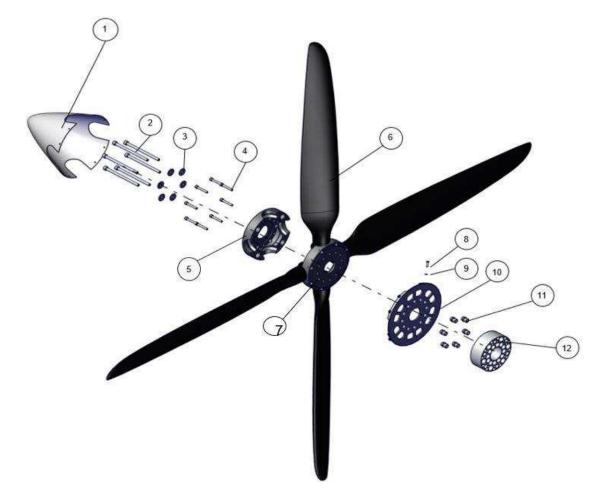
HTC 4 Blade Propeller with Spinner and Base plate
